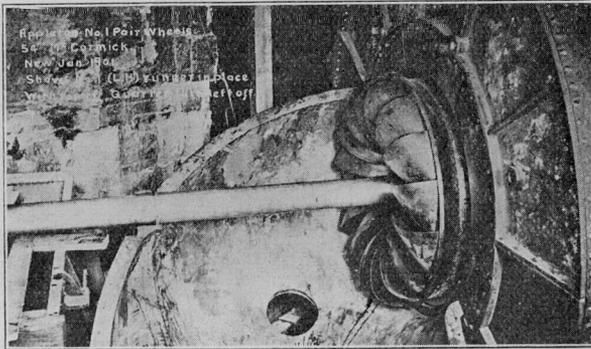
A. — 54-INCH HORIZONTAL WHEEL IN
